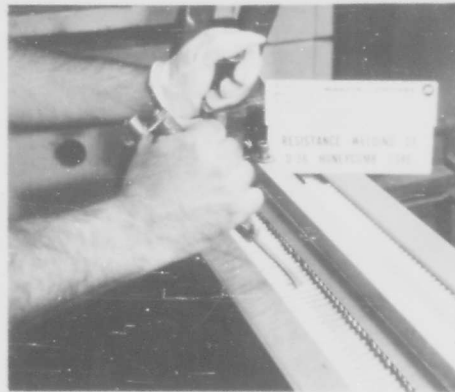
Tack-Welding Ends of Corrugations in Place
